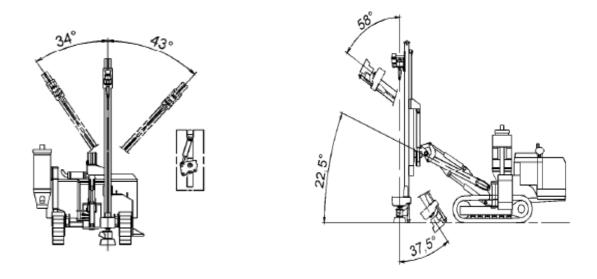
Rack swiveling (left) and boom tilting (right) angles.
